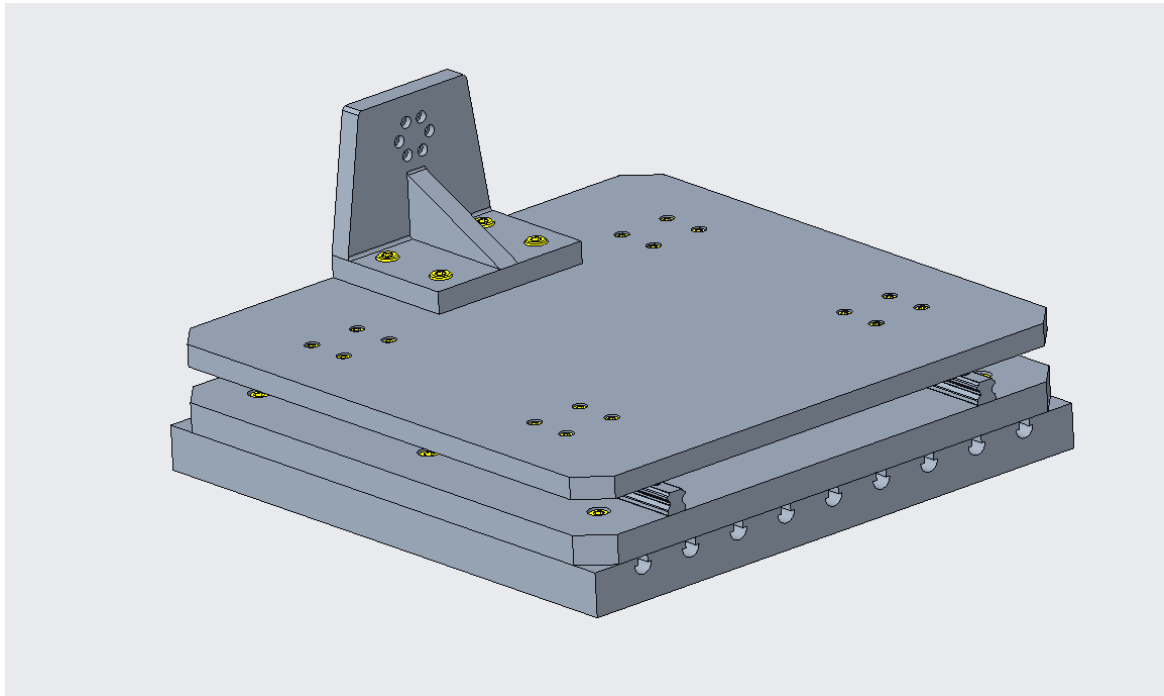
Assembly of the components used for experimental setup in Creo parametric
